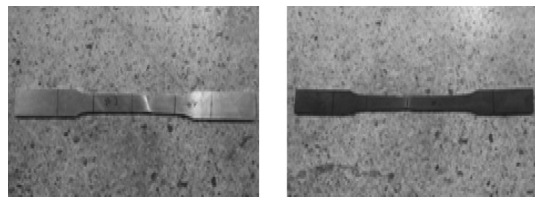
Examples of failure shape of ductile metal specimens after tensile test.
